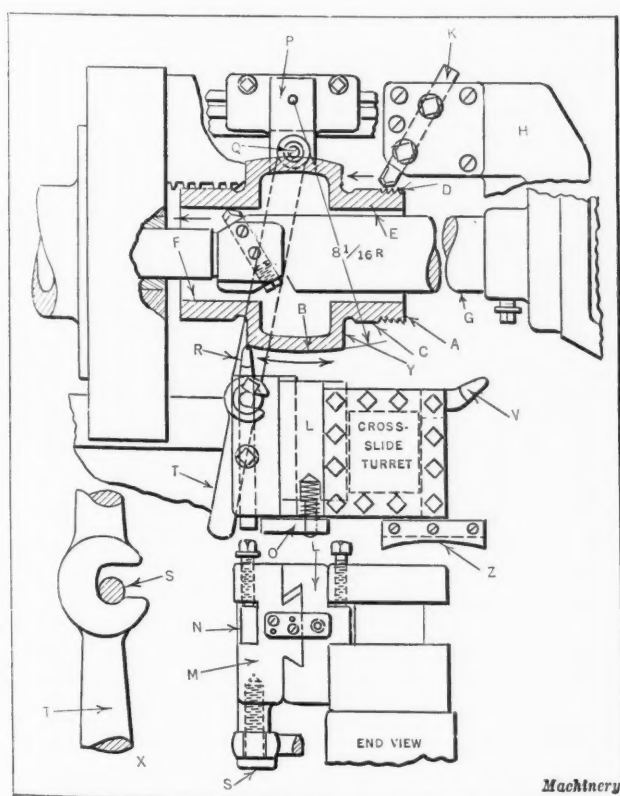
Combination Radius and Straight Turning, Boring, and Facing Tools
